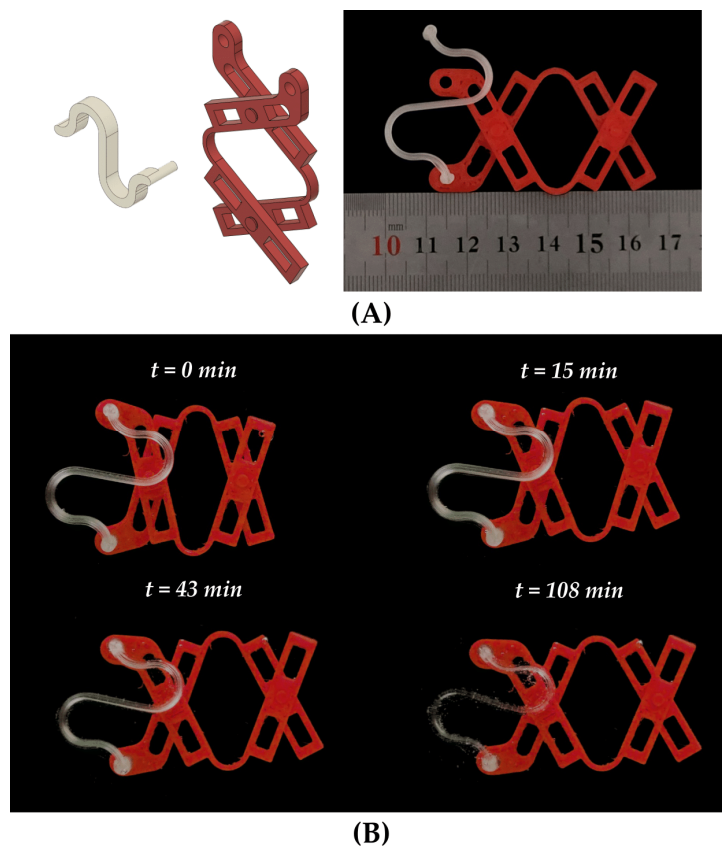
(A) CAD models & prototypes and (B) shape-morphing test for actuator 47.
